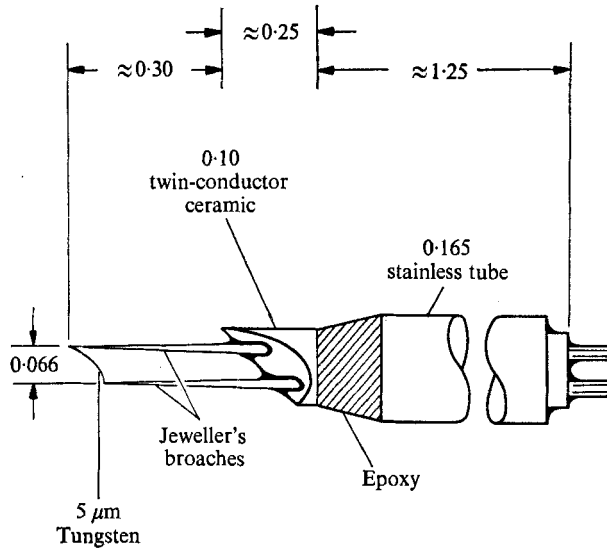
Hot-wire probe. All dimensions except wire diameter in cm.
